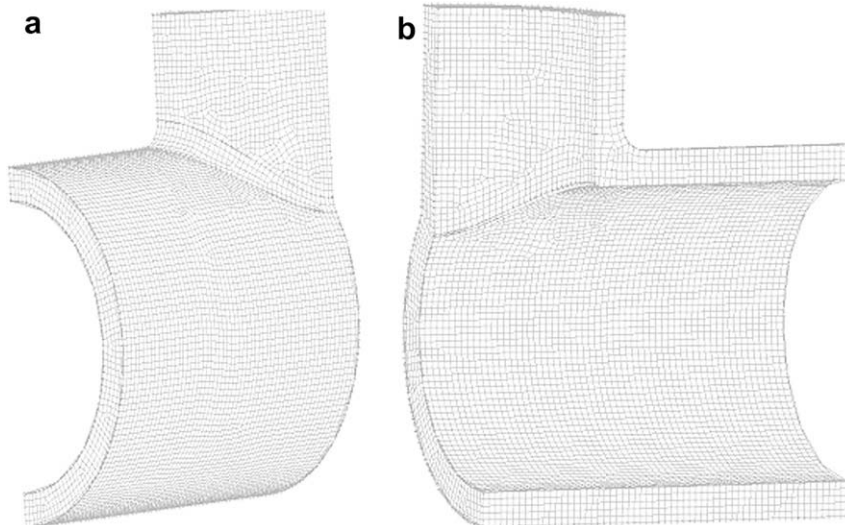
View of the details of the model: (a) outside view showing the fillet weld at the outer junction, (b) inside view showing slight rounding at the inner junction.
